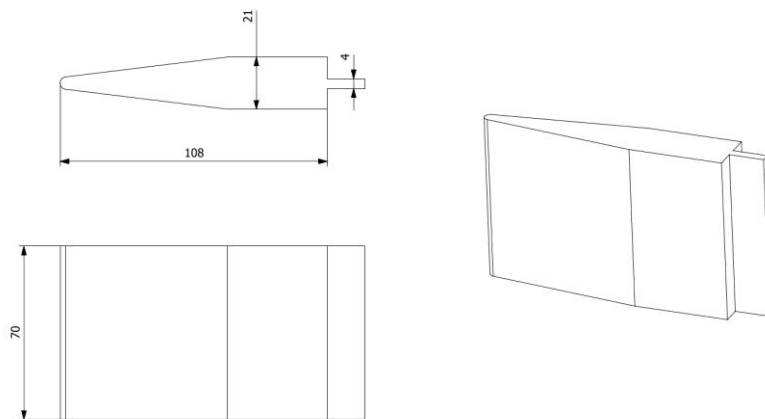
edge Rocket Technology wind tunnel test sample geometry
